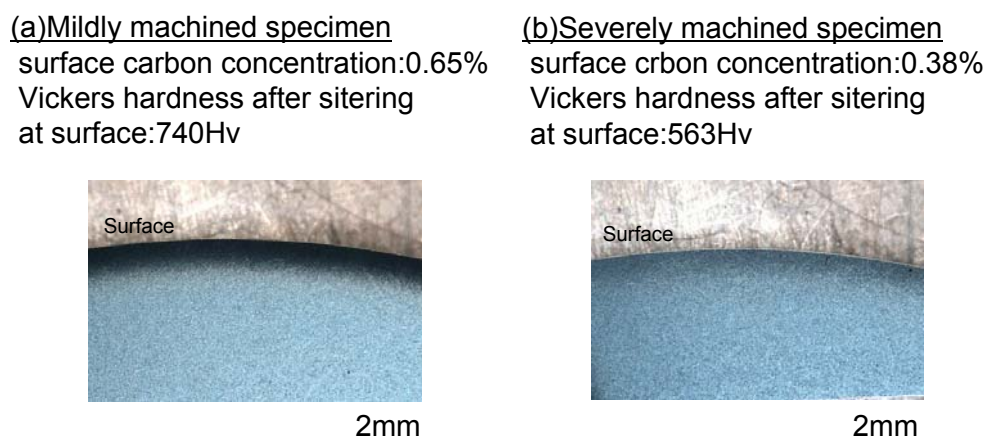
Carburized SCM420Nb F+P (Ave.Hv 172) specimen after machining.
